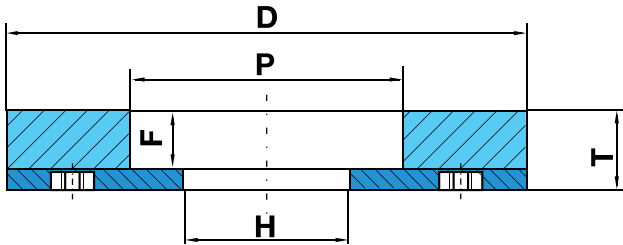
A60-80 H10/3V35 (standard)	8A54-6017V835 (high stock removal)
